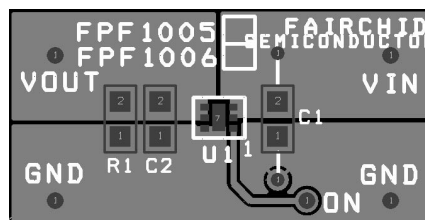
Demo Board Top and Surface Mount Top Layers View (Pin 7 is Connected to GND)
